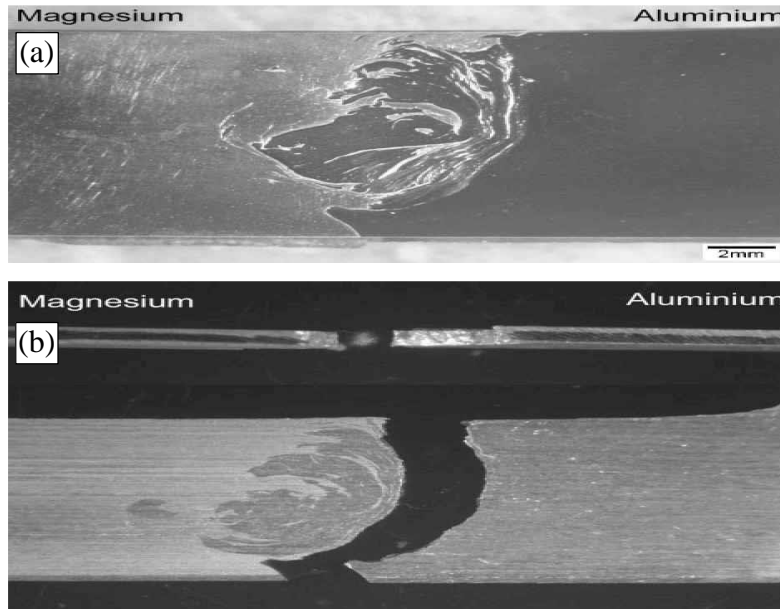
Optical macrograph of welded region, (a) before fracture and (b) after bend test. ([McLean et al., 2003](#))
